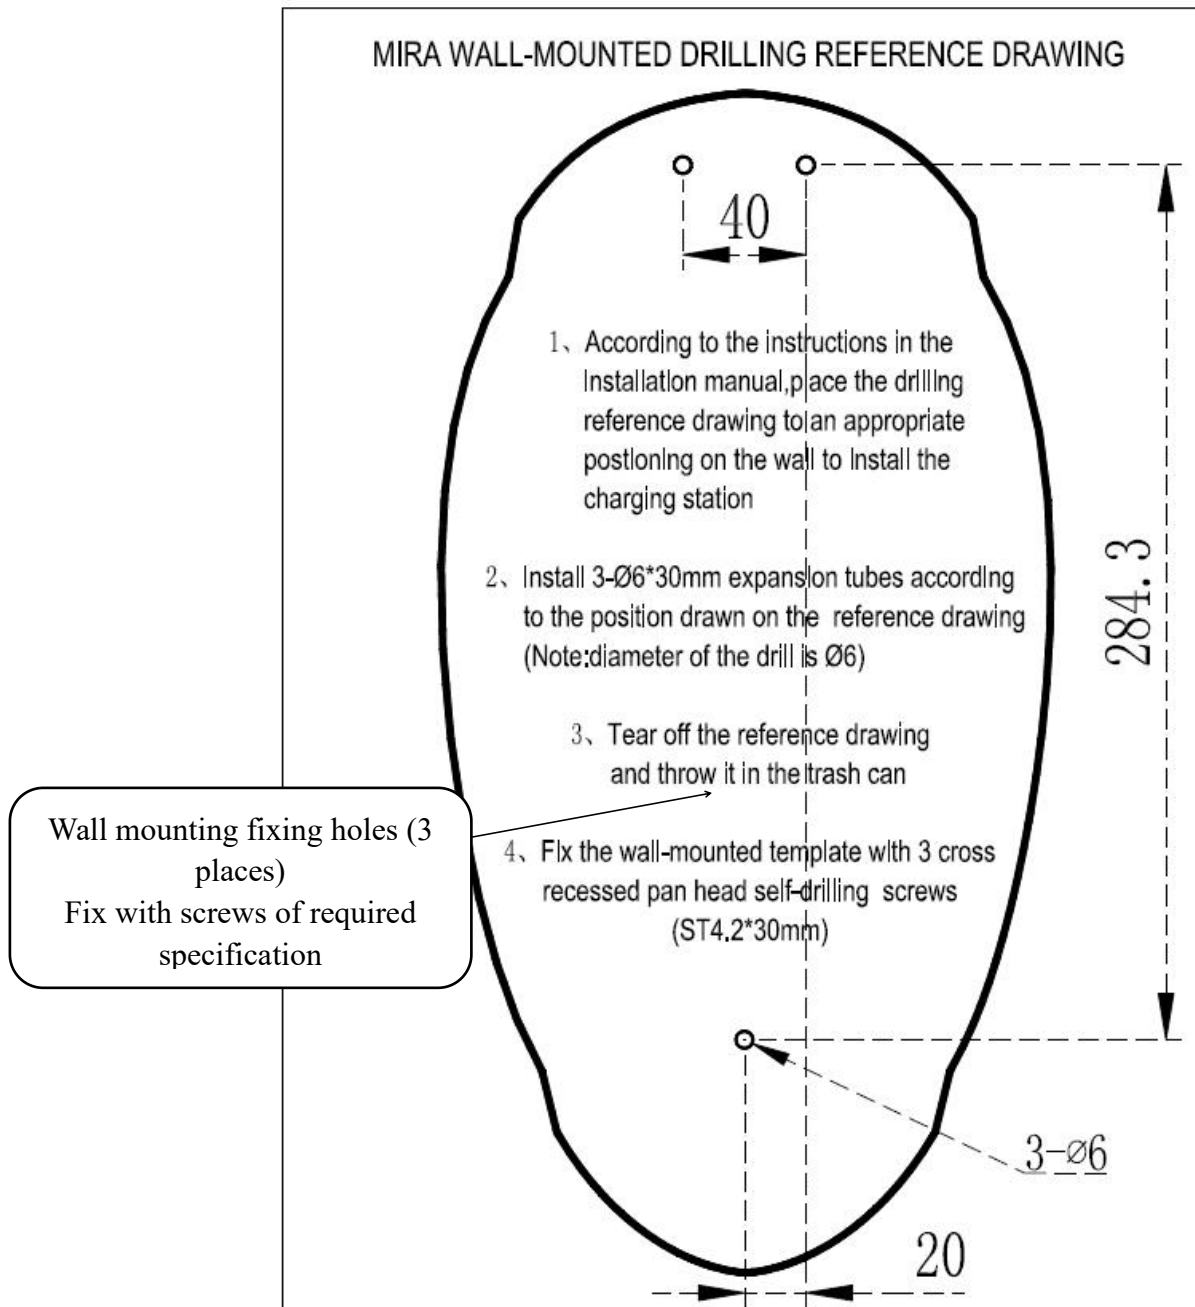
Wall-mounted hole location (unit: mm)
